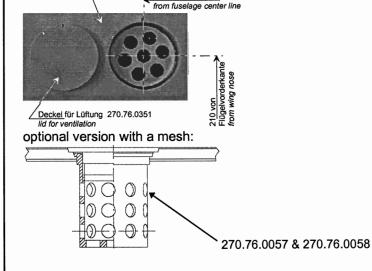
7 Automatic Valve Opener at the Wing Root Rib
